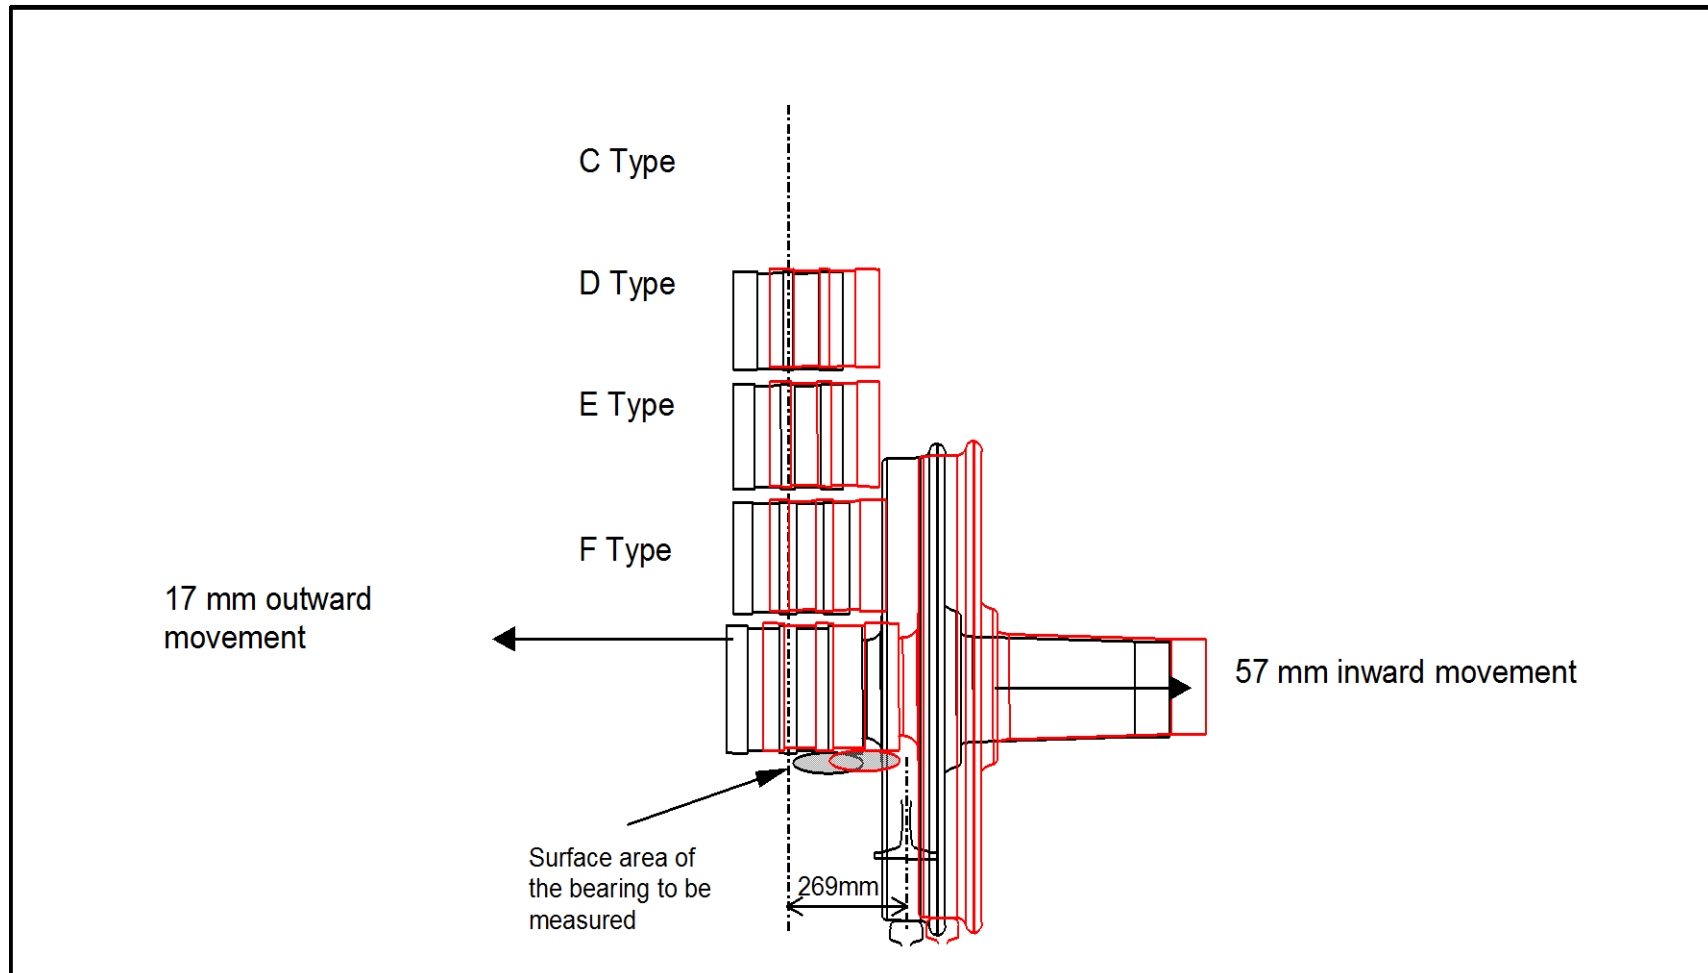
Measuring position on roller bearings, showing inward and outward lateral movement possible
